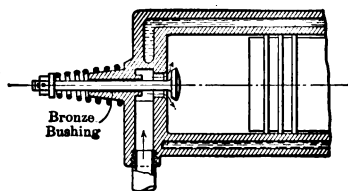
Horizontal Valve with Bronze Bushing in Stem Guides.
